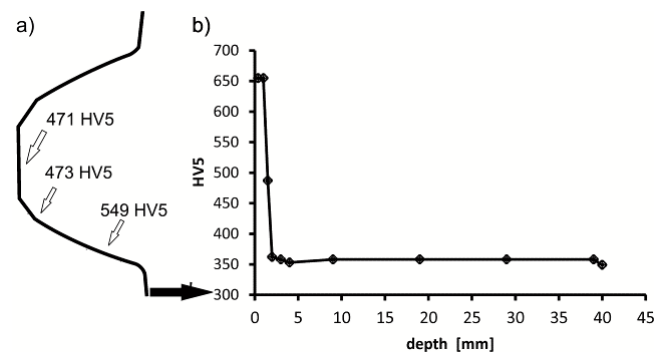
Hardness values at axle shaft cross-section: a) tooth top and flank; b) hardness profile at tooth bottom to the axle shaft centre.
